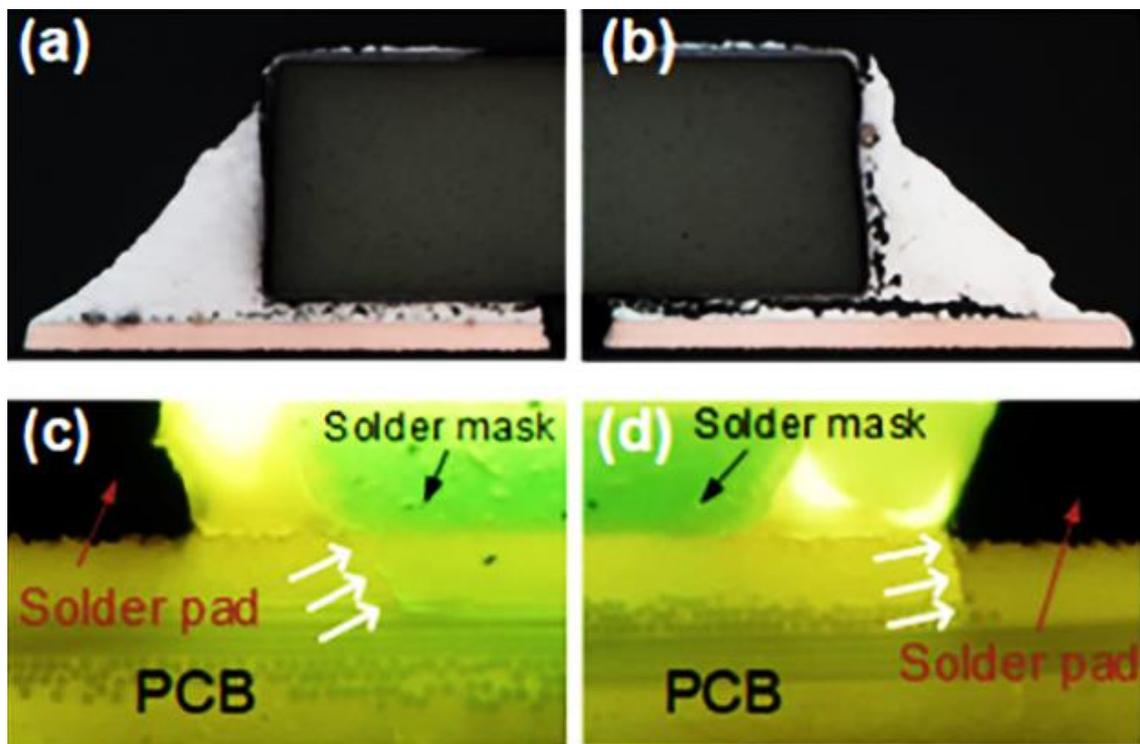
Cross-sections of the solder joints to a thermally cycled resistor showing (a– b) cracks in the two solder joints and (c–d) cracks in the PCB laminate.
